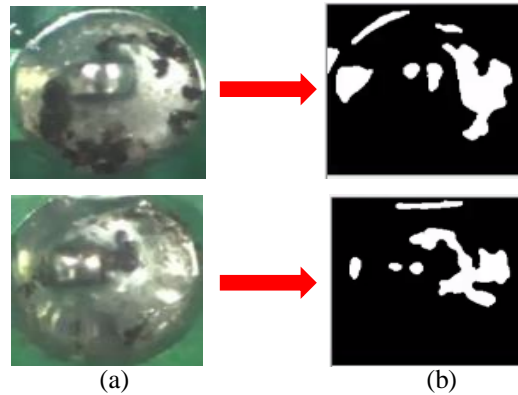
Impact of longer pre-heat time required by the solder pad on the distribution of light on the solder joint surface. (a). Solder pad connected to a larger PCB track or copper plane. (b). Identified illuminated regions on the solder joint surface
